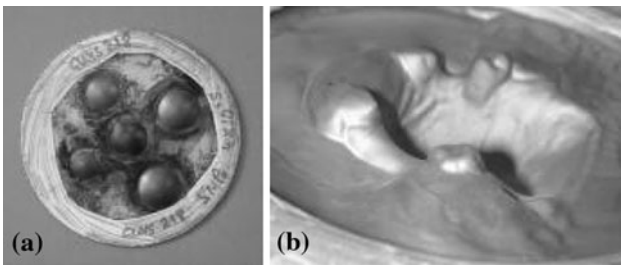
Examples of superplastic forming pieces. (a) External surface of five-hole test and (b) internal surface of partial upper denture base
